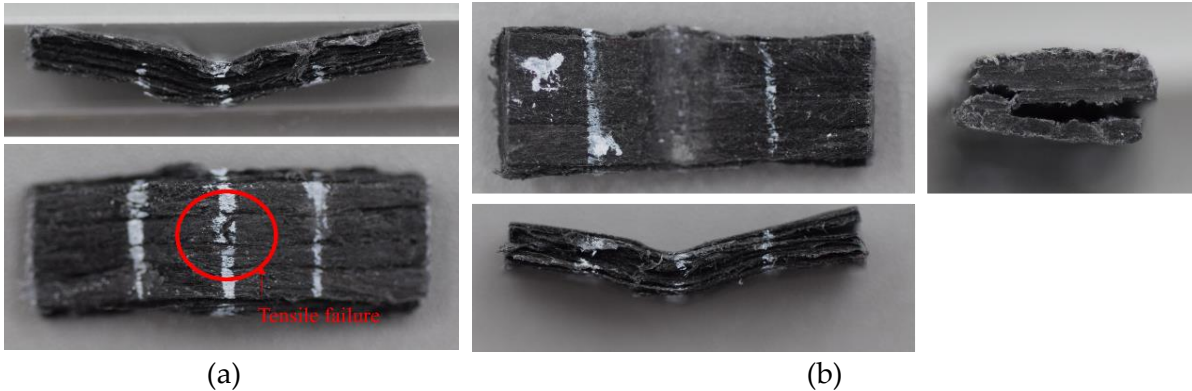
As-printed SBS failure sample: (a) tensile fracture on bottom side; (b) inelastic deformation with side layer separation.
